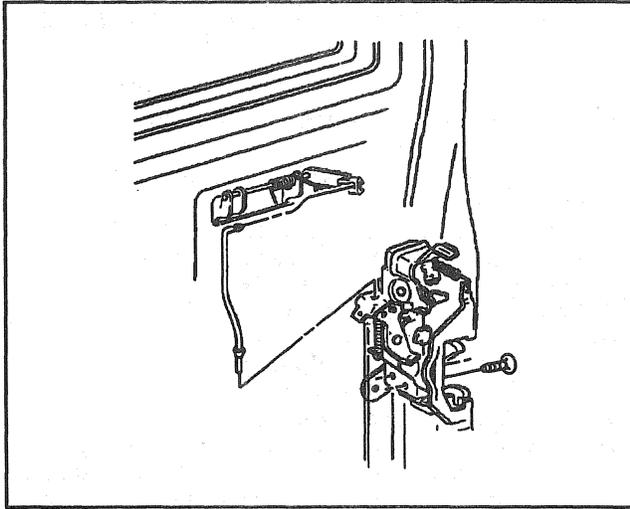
Outside Rear Side Door Handle and Lock Assembly
